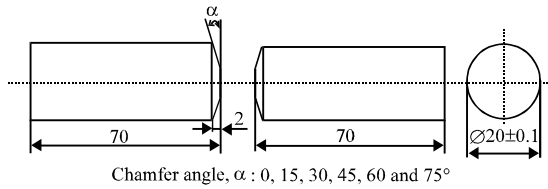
Geometry of CDFW specimen (dimensions in mm). Left side is rotated part and the right side is stationary part that subjected with compression force
